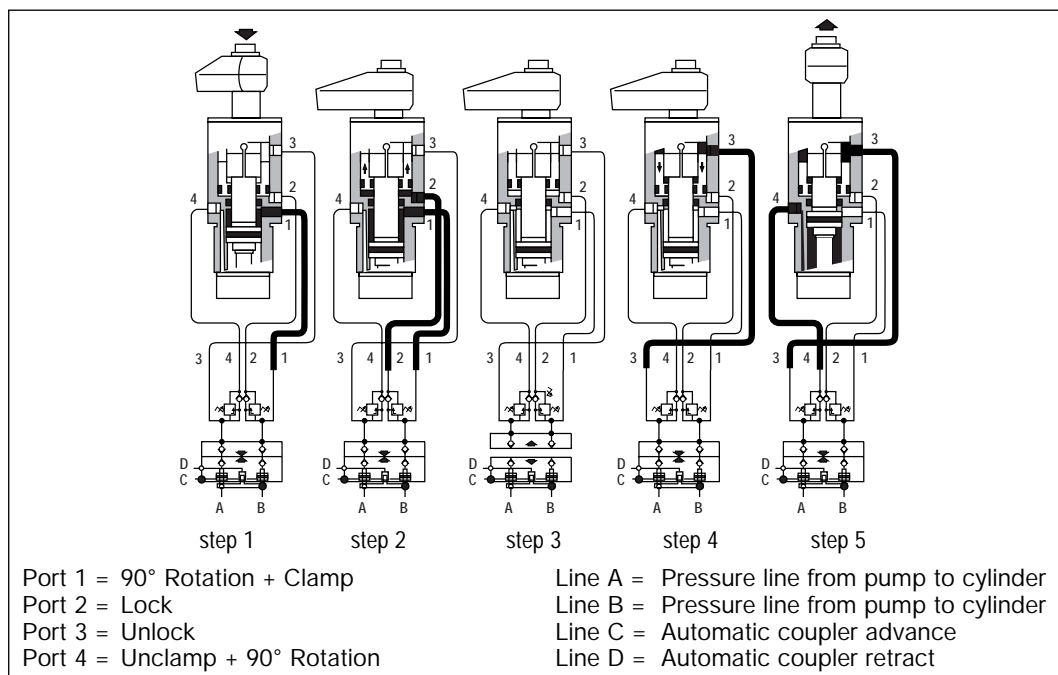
Hydraulic clamping and hydraulic mechanical locking
